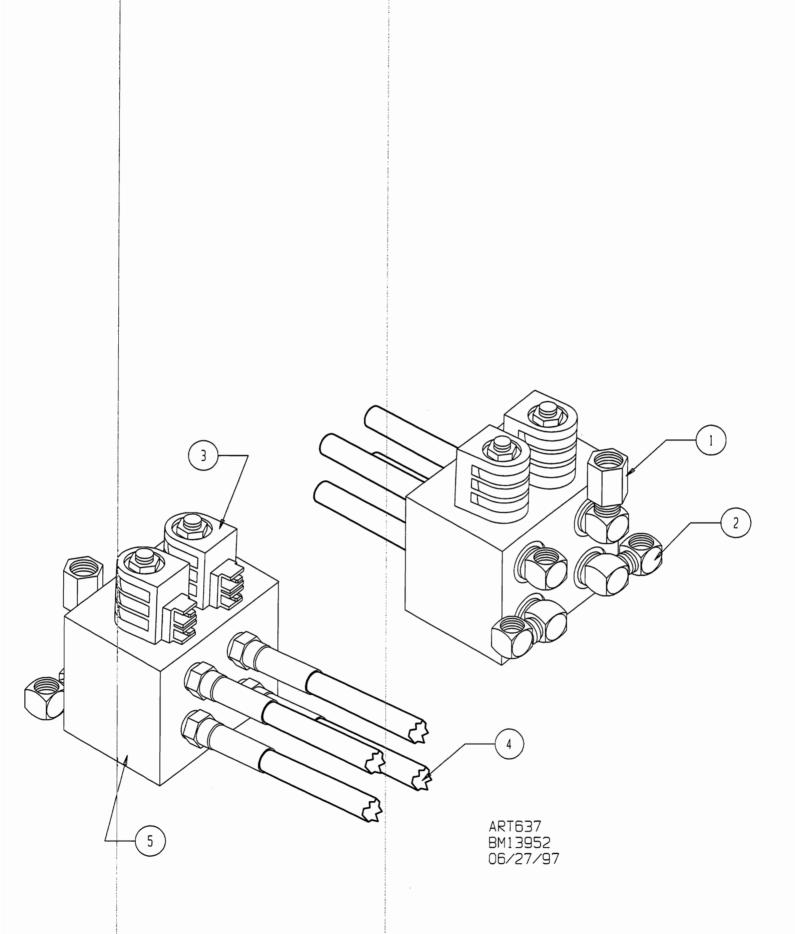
Dual Fuel & Foam Filled Tire Option Crossover Manifold Assembly
